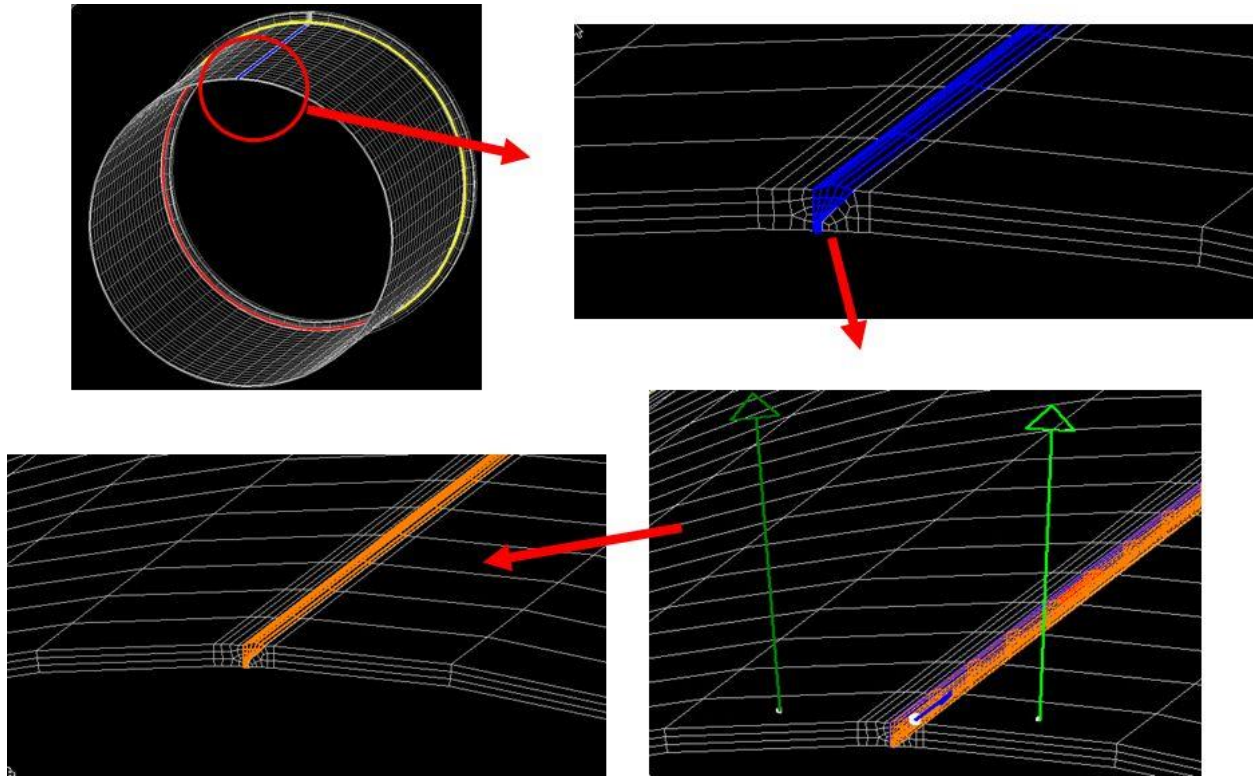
Choosing weld pass for butt weld in submarine
